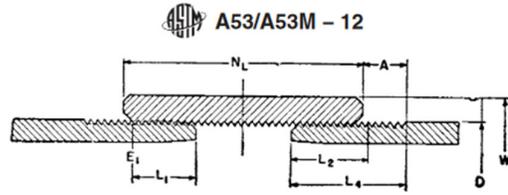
Dimensions of Hand Tight Assembly for Use with Table X3.2
